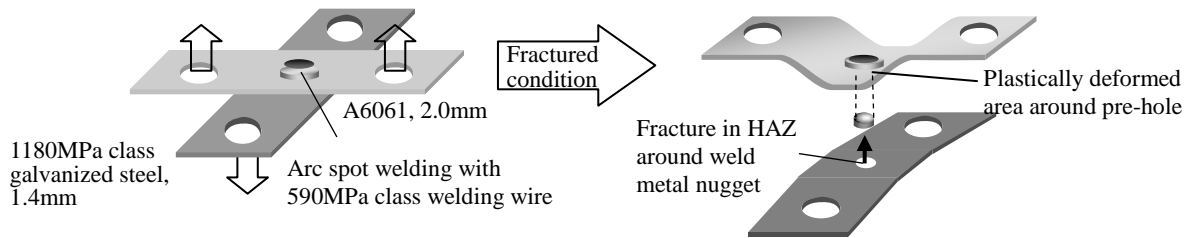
Typical schematic fracture pattern of EASW joint in cross-tensile test
